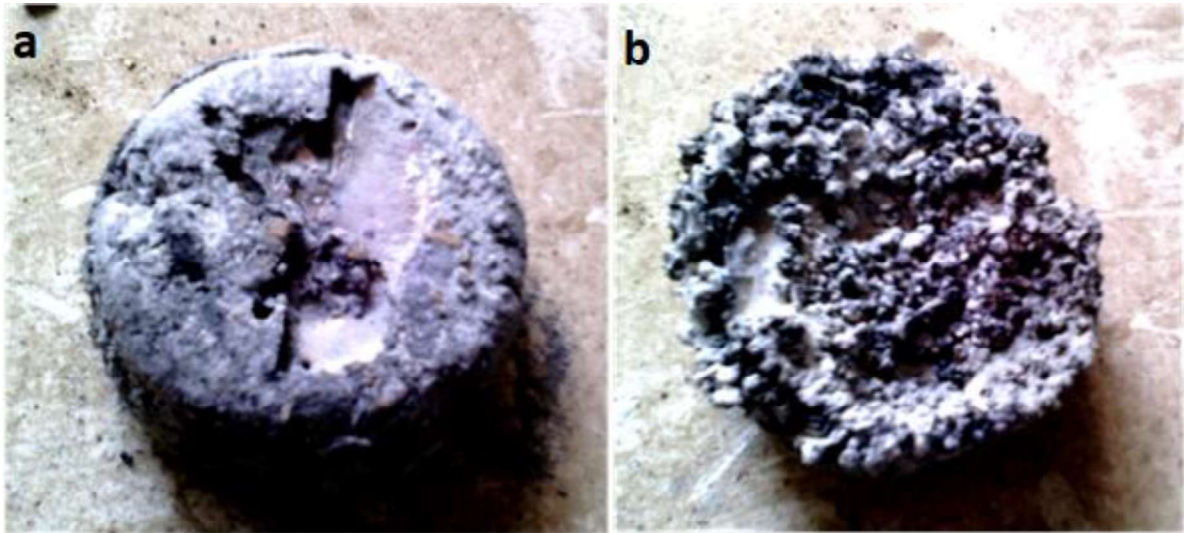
6: First magnesium alloy casting a) Backside b) Front side
